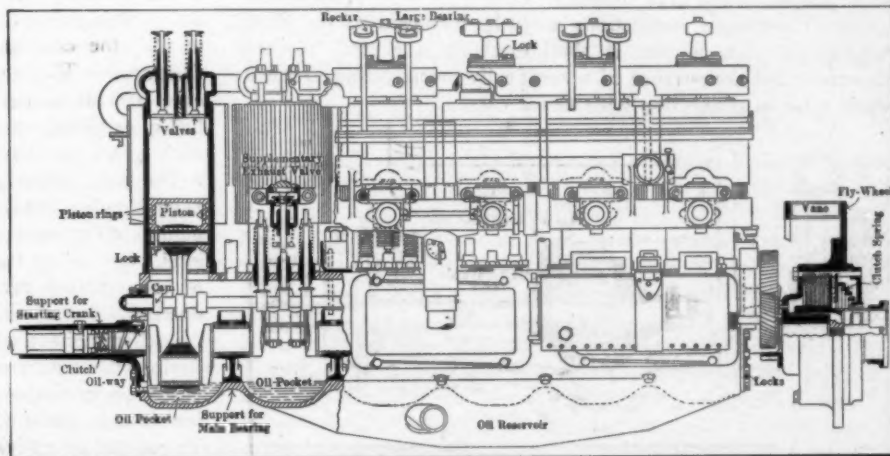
Side elevation of the six-cylinder motor showing the valves in the head, details of the piston and the oil pockets in the bottom of the case
